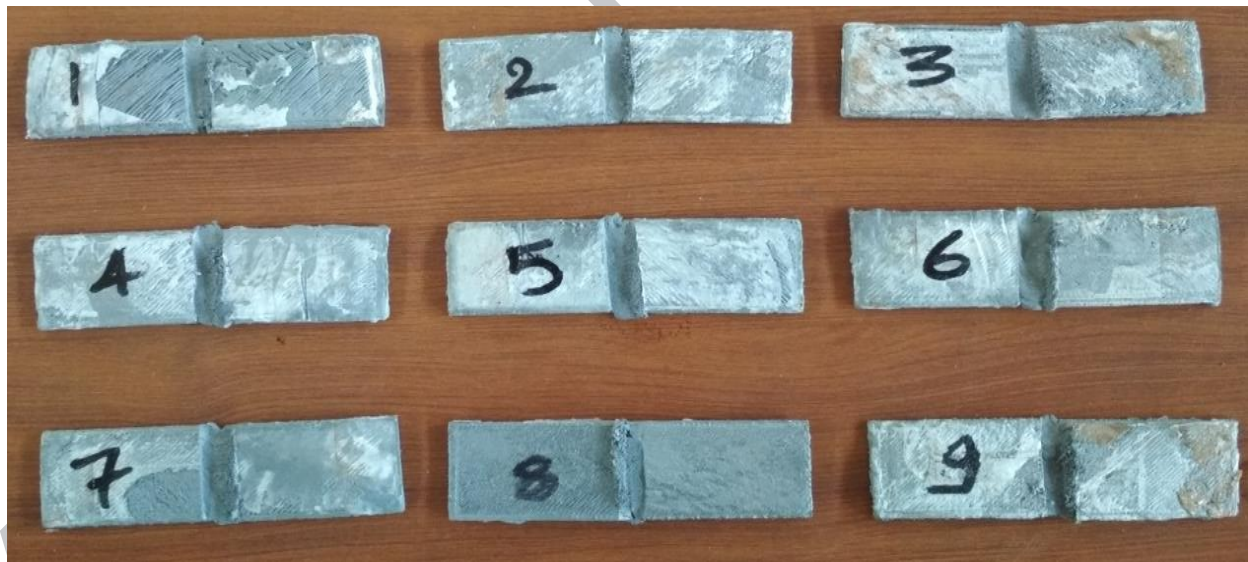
Welded parts as per following DOE of Table 3
